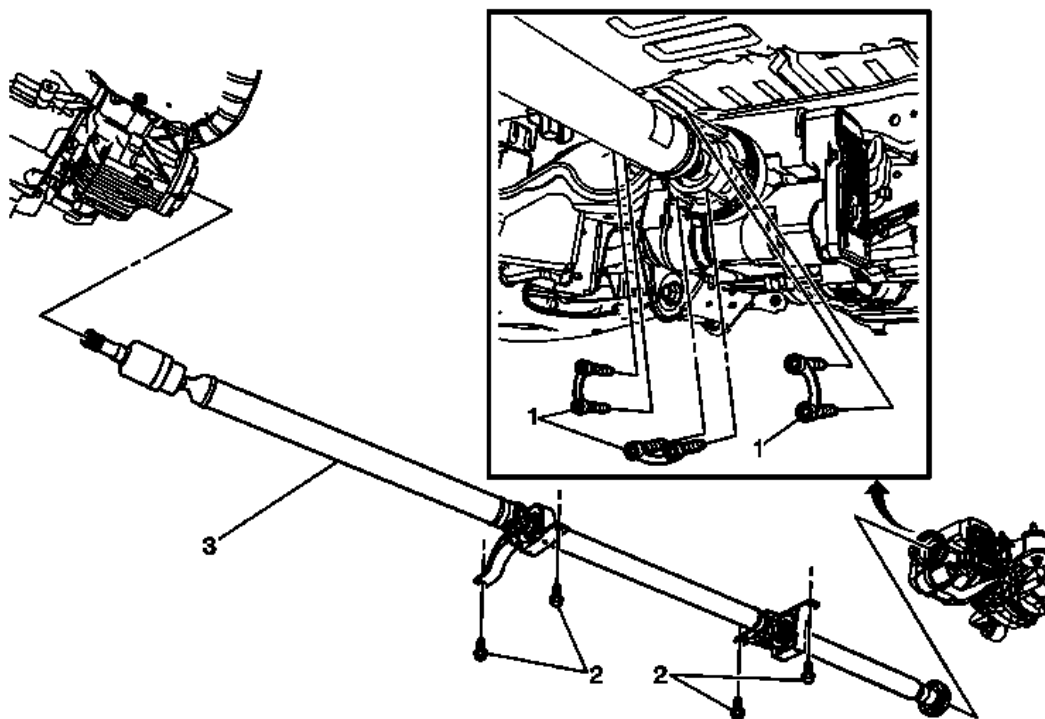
View Of Propeller Shaft, Mounting Bolts & Retainers
